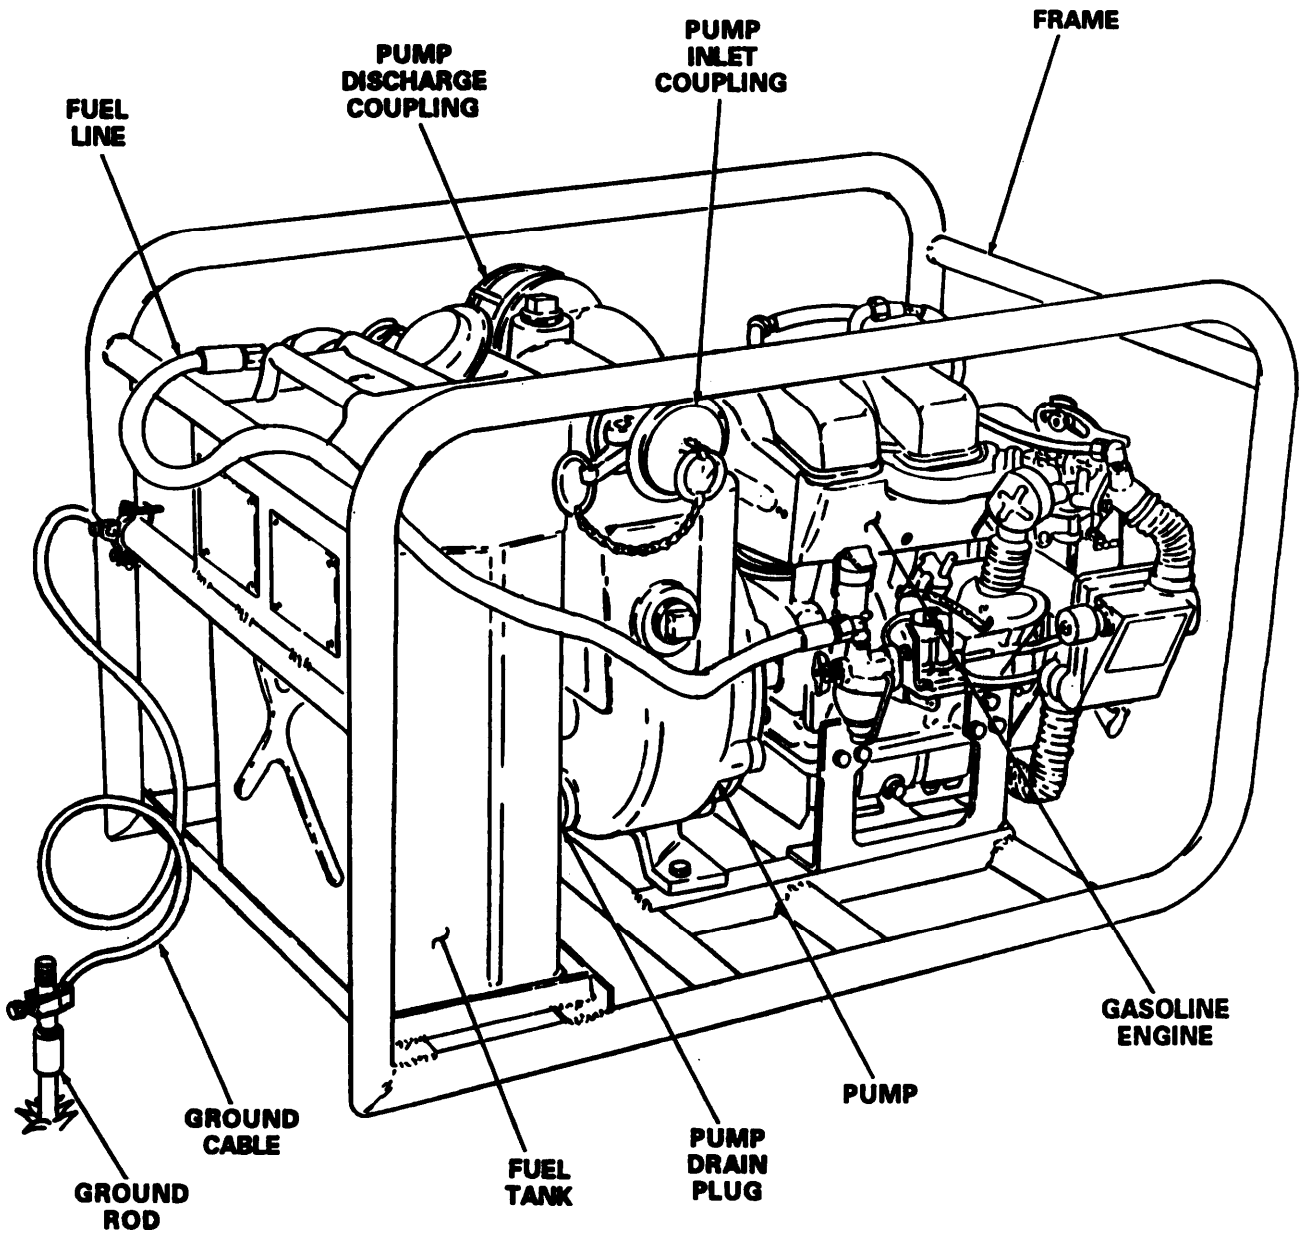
Pump Assembly, NSN 4320-00-427-002
